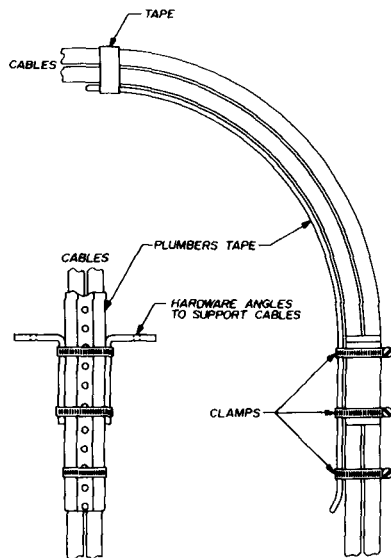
Support assembly for securing coax cable and rotator power lines to the tower. Plumber's tape limits minimum-radius bend for the transmission line, which is important to avoid breakage or short circuits. Clamps are ordinary stainless-steel hose clamps assembled with plastic electrical tape between clamp and cable bundle.
